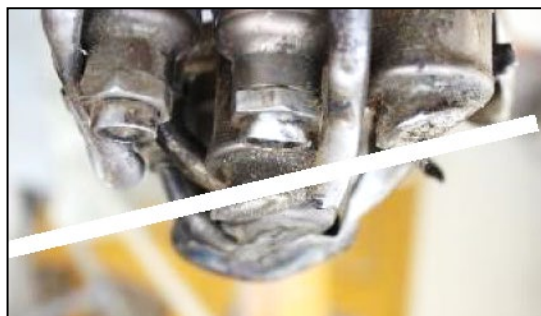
Drain Collector Assembly Forward View (Accident Case)
